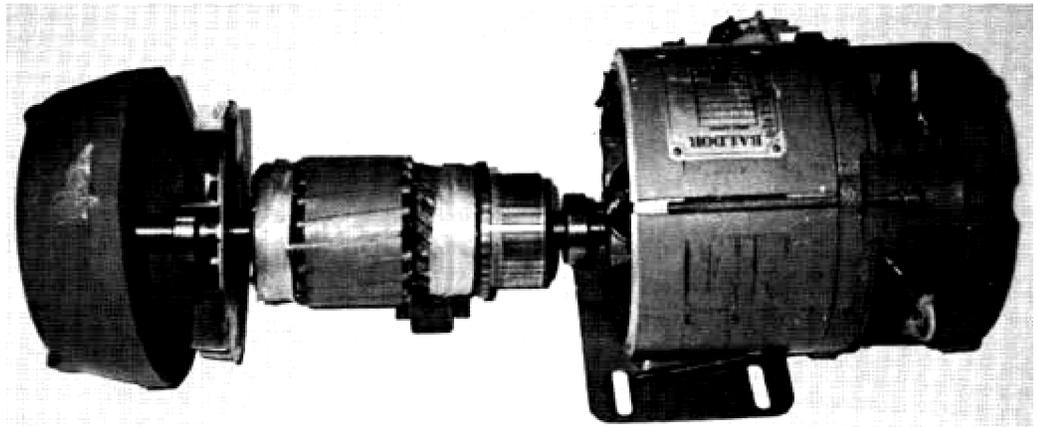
An exploded view of a DC motor. This diagram shows the relationship of all of the components.
